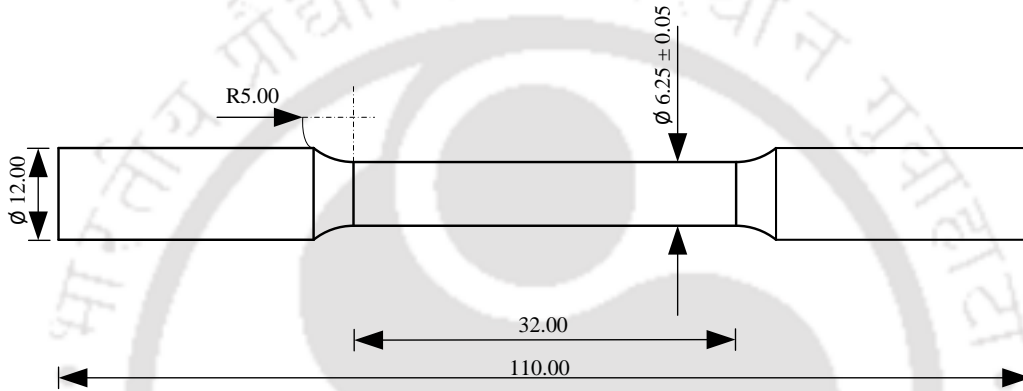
Smooth uniform round bar specimen geometry and dimensions of SS316L.
